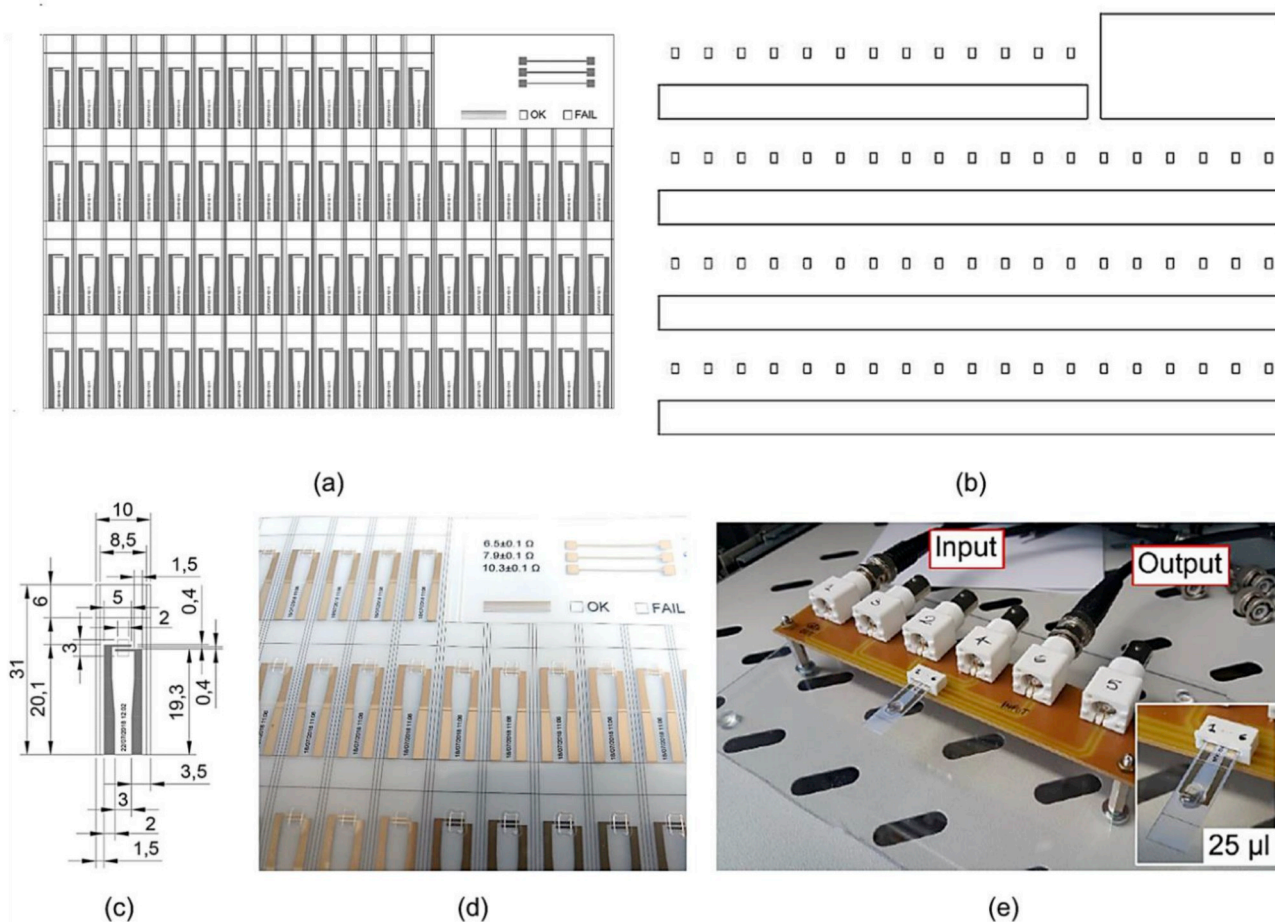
(a) Printed sensors A5 sheet layout with printing quality control (top right part); (b) Plastic pouch cutting layout; (c) Dimensions of the designed sensors (in mm); (d) Picture of the printed and passivated sensors; (e) Test bench used for the EIS measurements.
